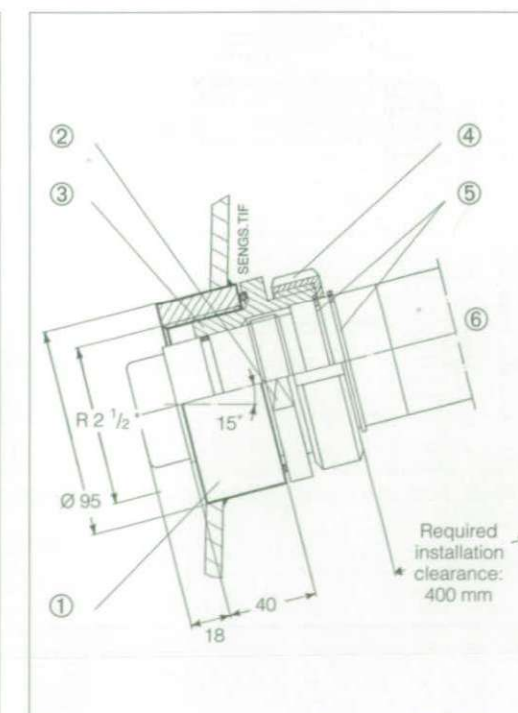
Screwed socket GS or GS-V for Sensopac CPA 320 for welded mounting
